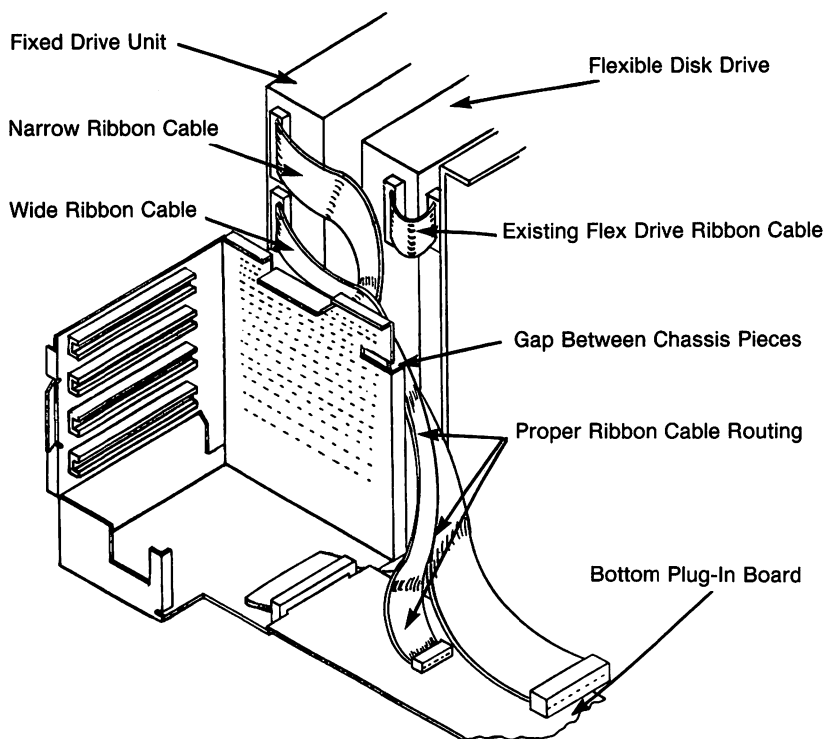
Routing of ribbon cables through chassis (rear quarter view)
